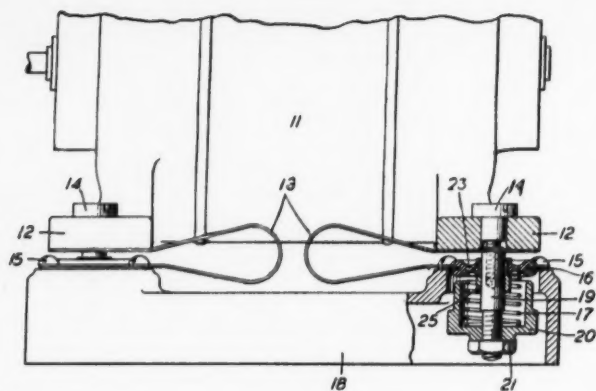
Vibration-absorbing mounting employs flat U-shaped and helical springs
